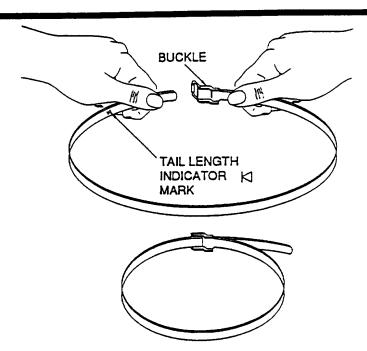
Banding Adapter Assembly (Sheet 1 of 2)
